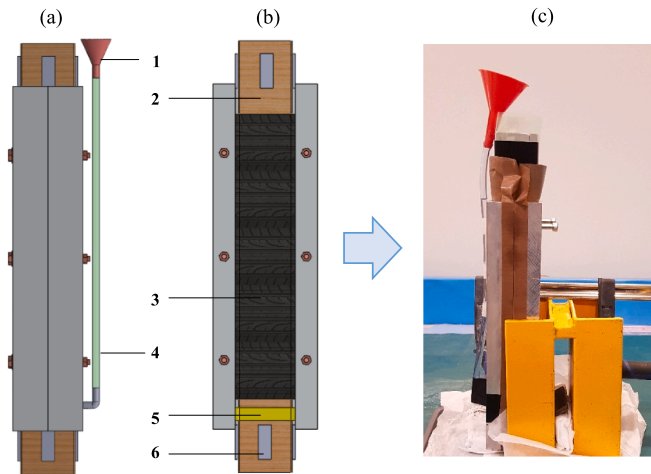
Solid model and actual manufacturing technique of SHS SMPC members; (a) side view (b) inside view of the mold (c) actual fabrication setup.
